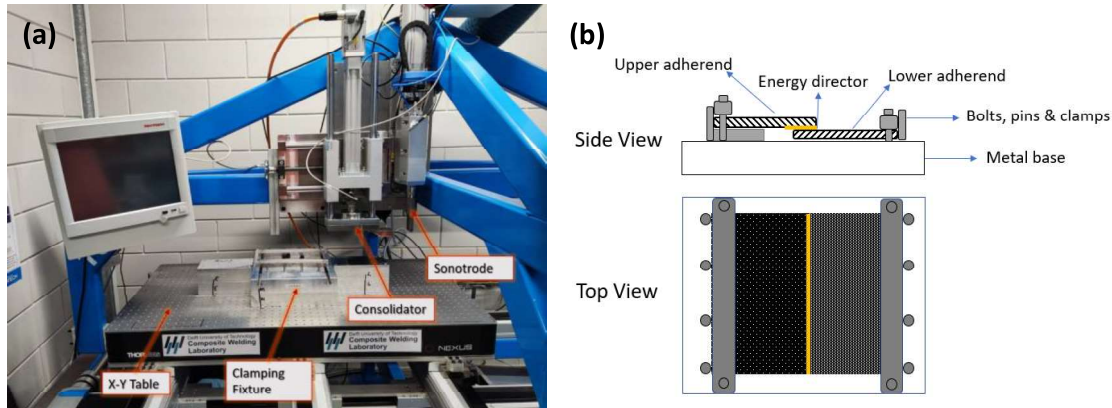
(a) Continuous ultrasonic welding system, (b) the welding clamping fixture that is used for adherend and ED placement for CUW experiments
